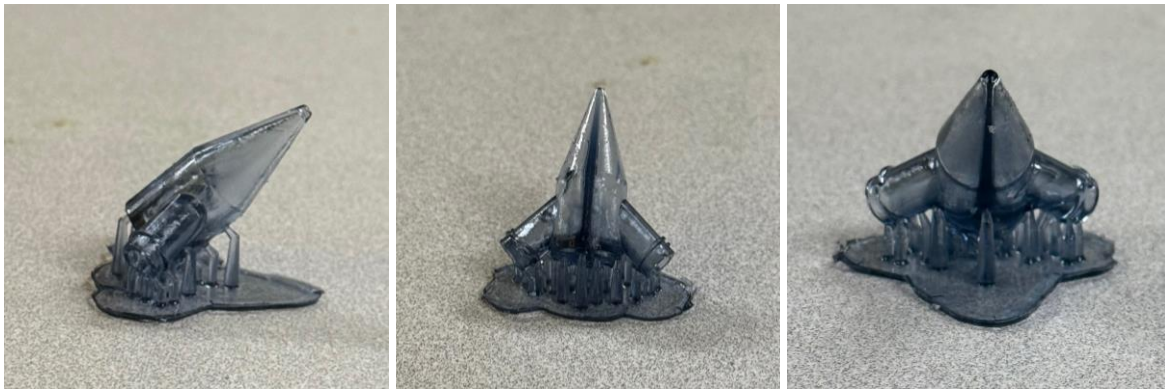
Tri-view of a Single-Printed Nozzle Removed from Build Plate
